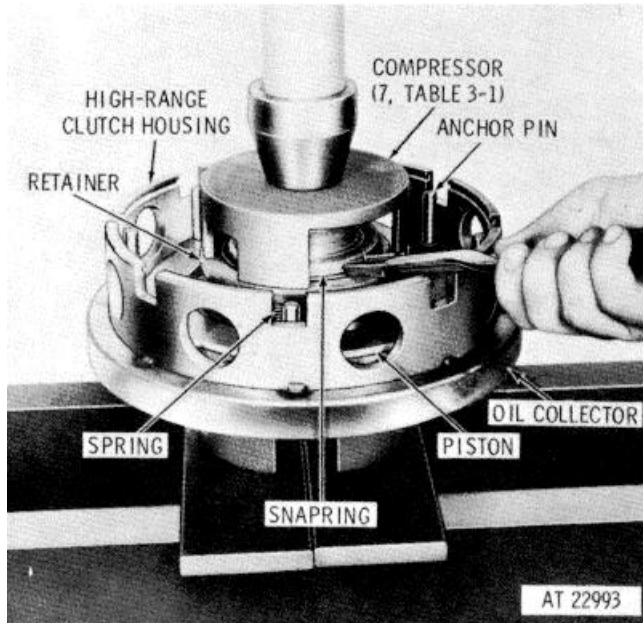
Removing (or installing) high-range clutch piston return spring retainer retaining ring.
